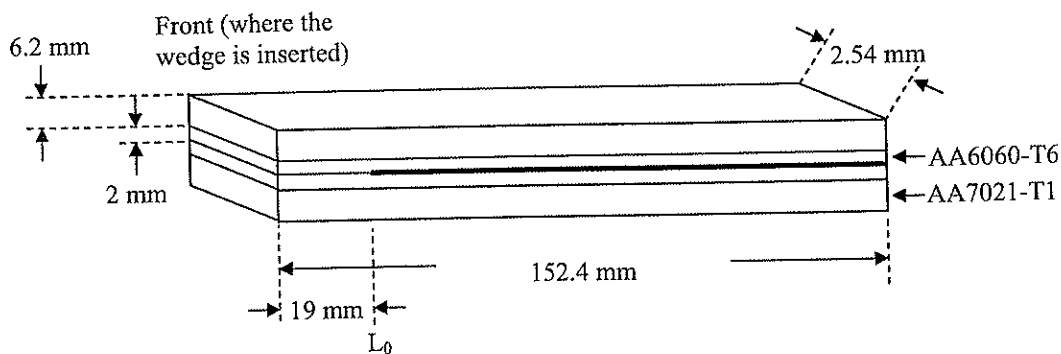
Schematic drawing of a reinforced double cantilever beam (RDCB) specimen before insertion of the stainless steel wedge. Geometry according to ASTM D 3762-79, except for specimen thickness. Bondline thickness is 0.1 mm. Measurement of initial crack length starts at point L_0 .
